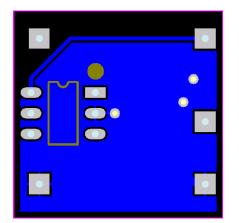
Bottom, PCB Layout for TDFN4 1.2 mm x 1.6 mm (board size: 1" x 1")
